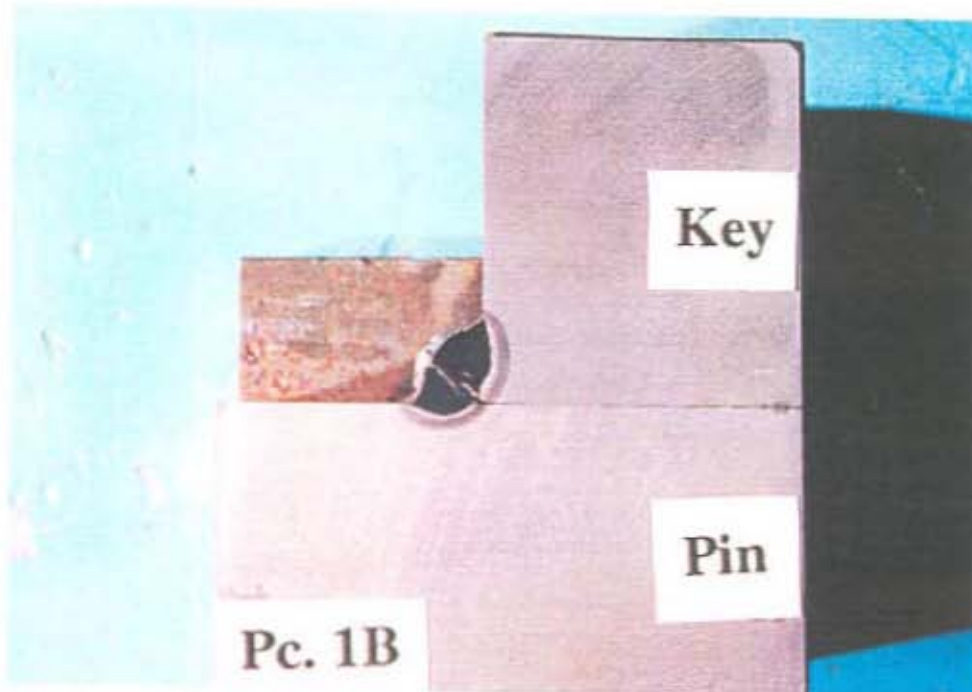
Cross-section of Cracked Trunnion Key Retainer Fillet Weld (Keyway 1B).
